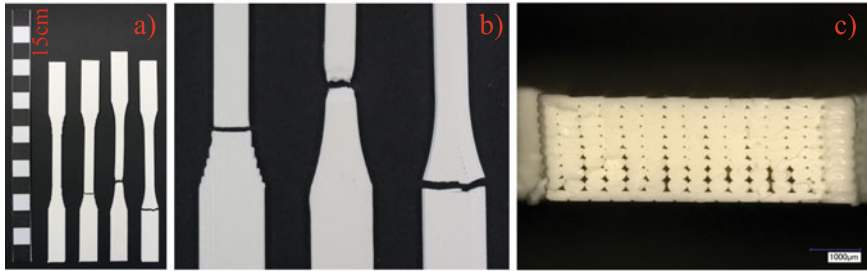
a whole specimen b break location (from left to right: 0D,0P,UN—0D,1P,UN—P,90D,6P,UN) c fracture surface
